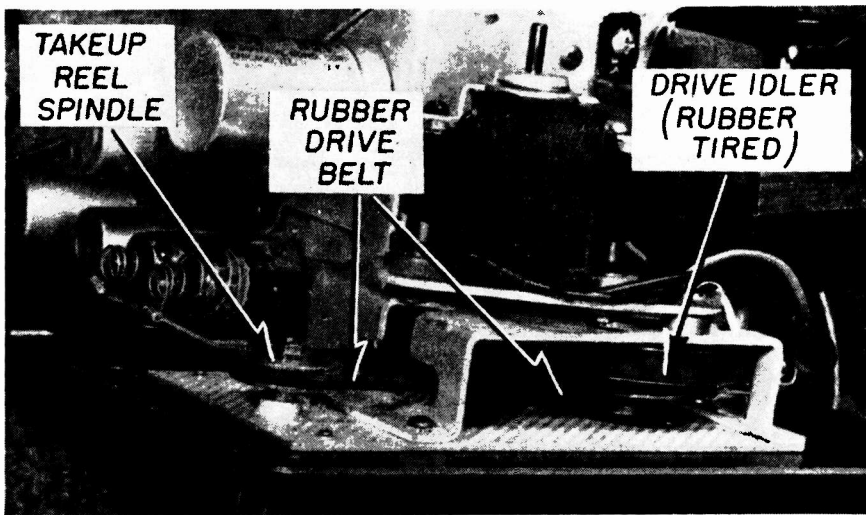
Below is bottom mechanical assembly of Ampro machine. Motor is atop drive housing.
